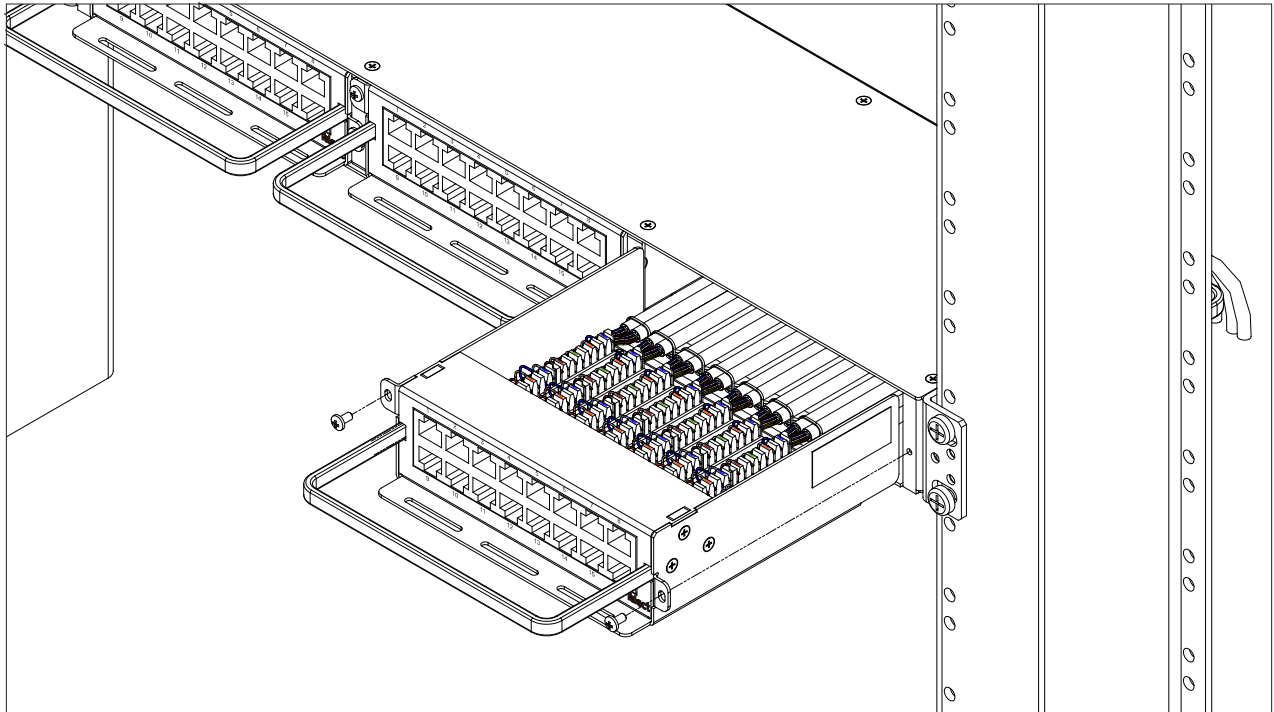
Example of Model ELF-9716-1700 finished cable and wiring
